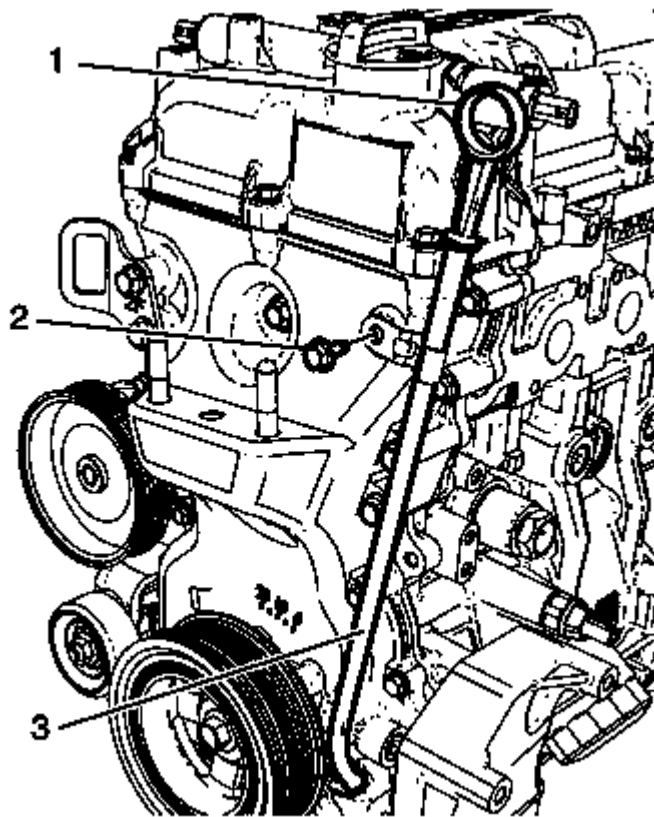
Oil Dipstick And Oil Level Indicator Tube Bolt
